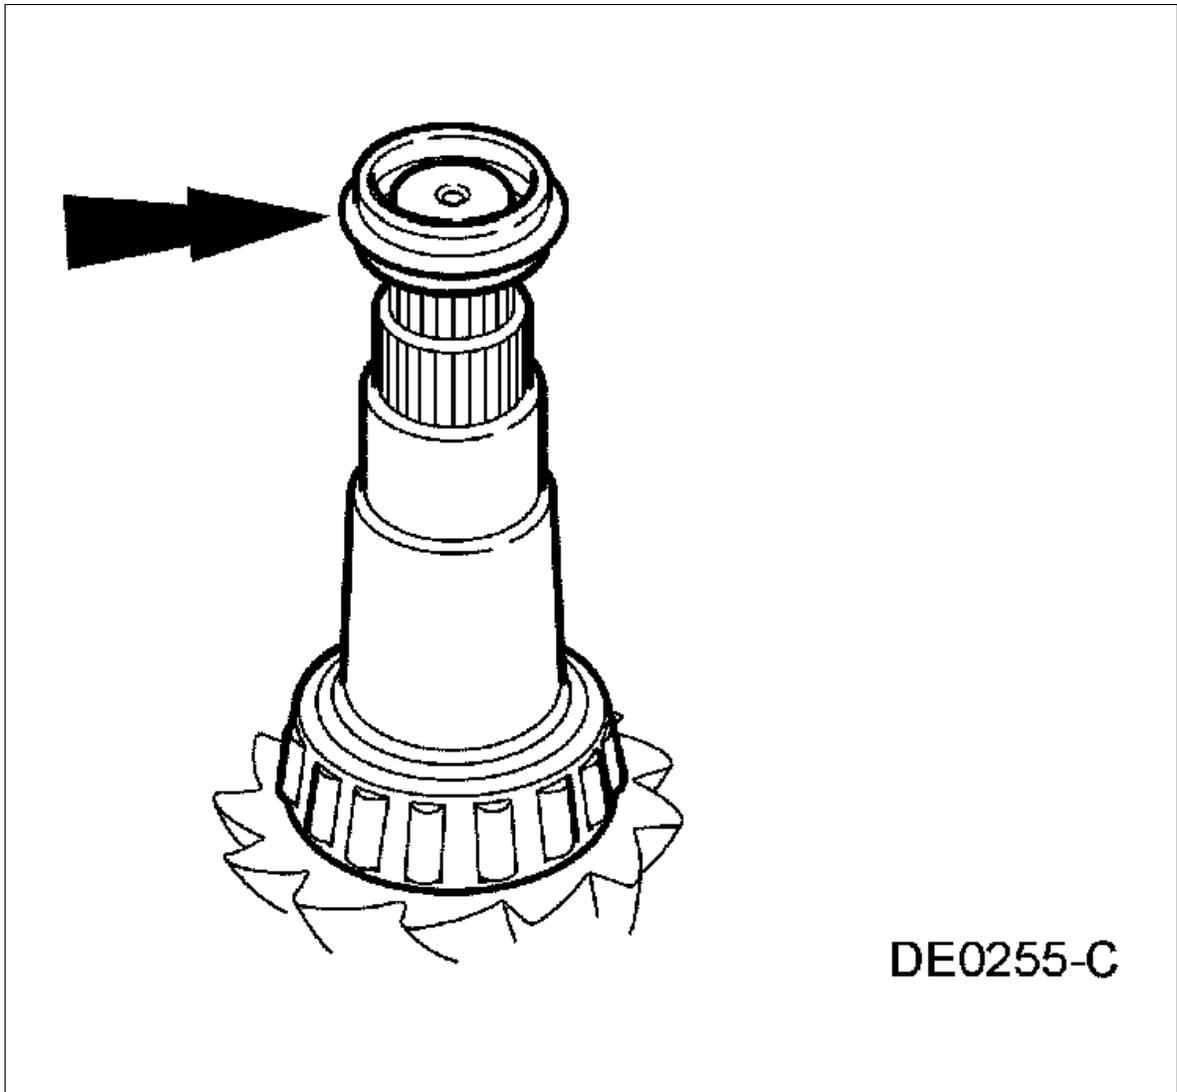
Removing Drive Pinion Shaft Oil Slinger And Outer Drive Pinion Bearing
